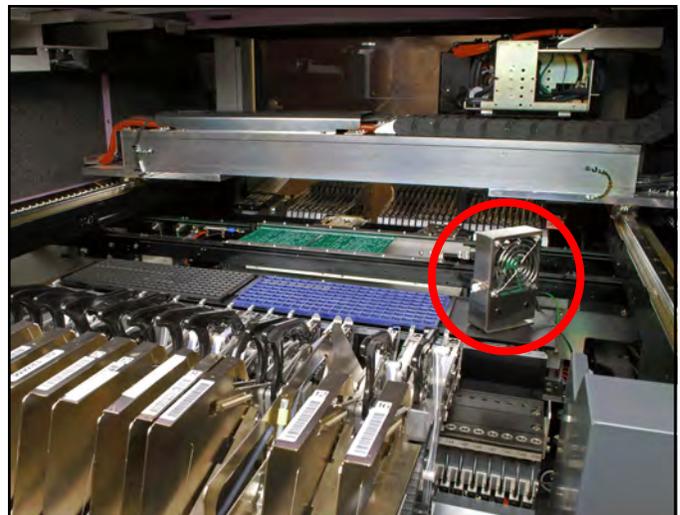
Using the Mini Zero Volt Ionizer inside automated machinery.
